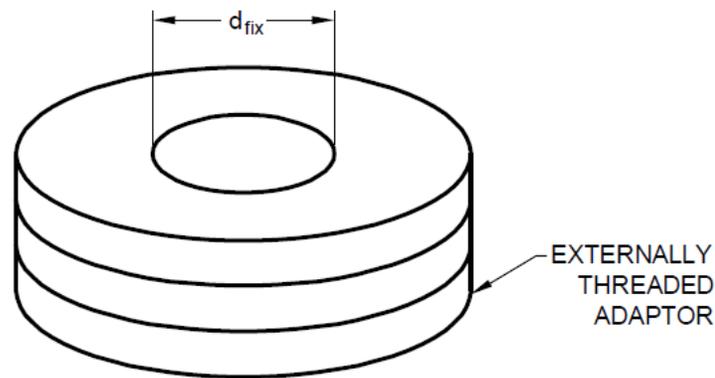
TYPICAL FIXTURE FOR UNCONFINED TENSION TESTS
